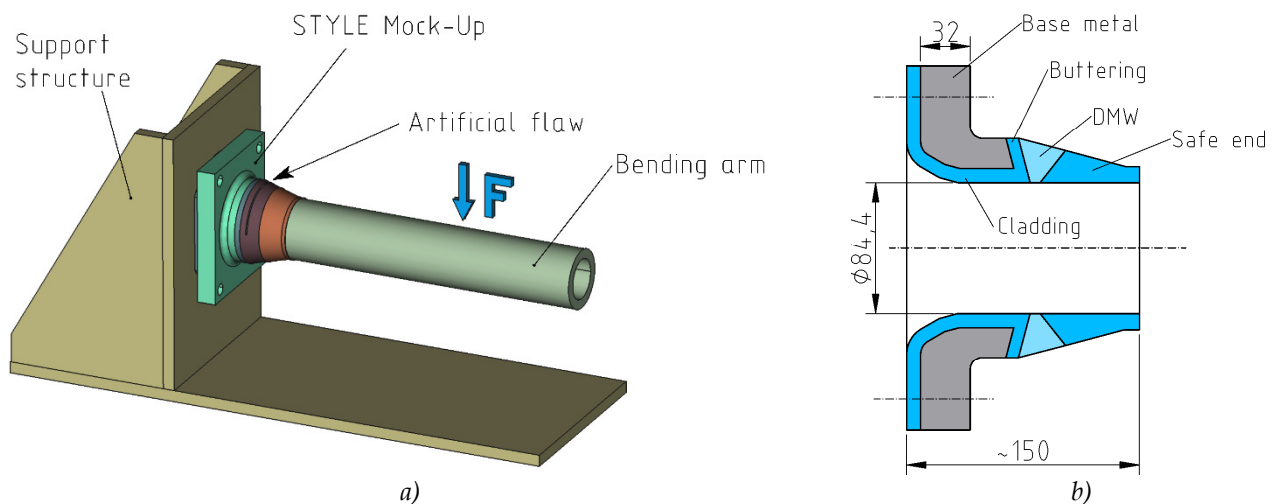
a) Concept of experimental set-up, b) Parts of the MU. (DMW=Dissimilar Metal Weld)
